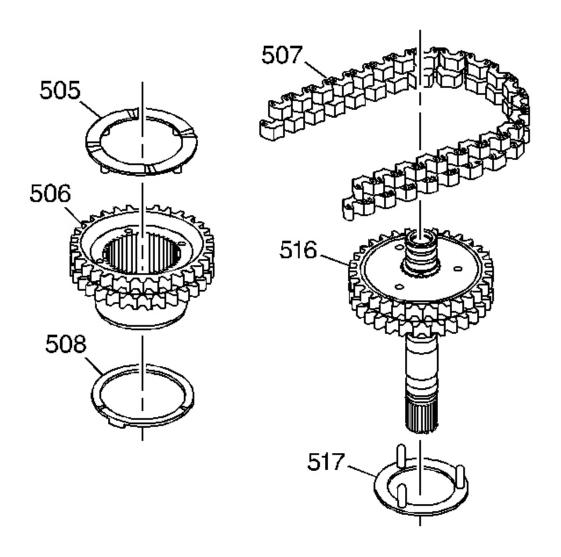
Installing Drive & Driven Sprockets Into Drive Link Assembly Courtesy of GENERAL MOTORS CORP.
